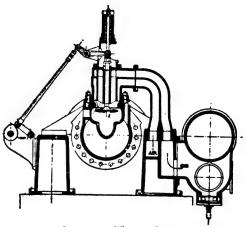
End Section of Kürting Gas Engine, showing Valves. Mather and Platt.
